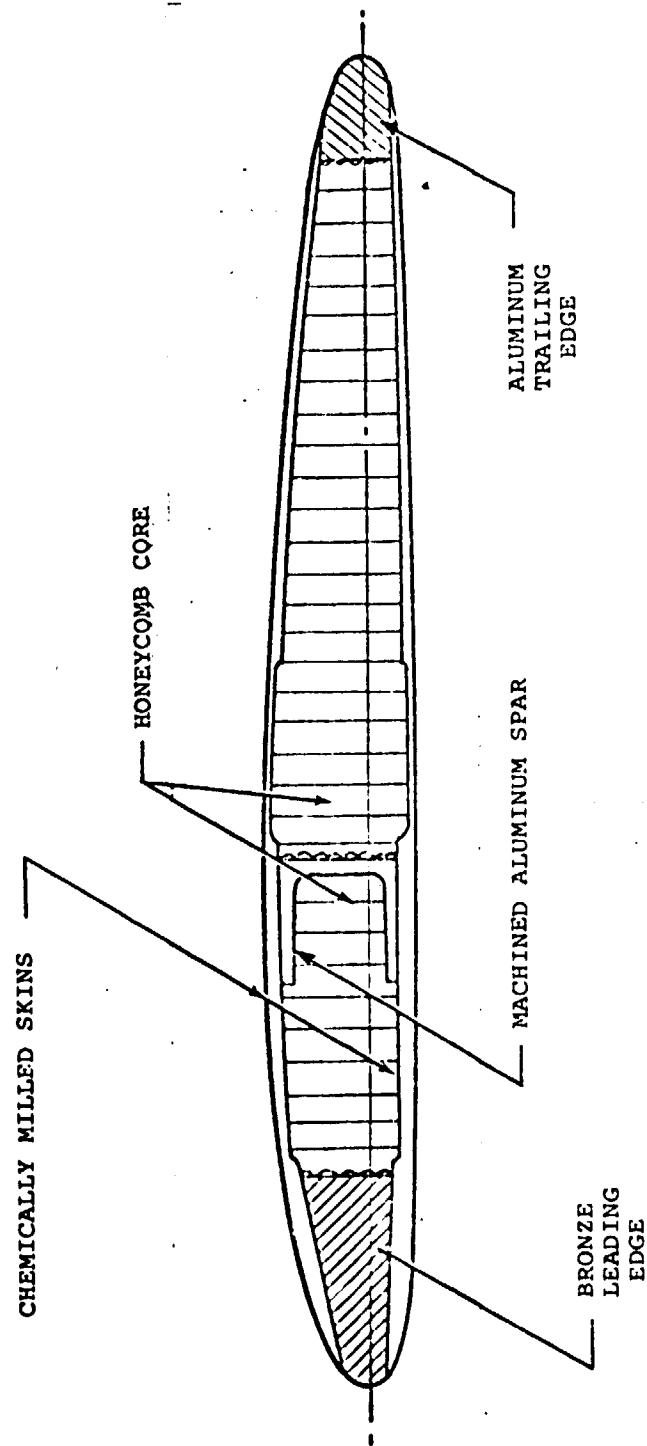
TYPICAL CROSS-SECTION OF MODEL ROTOR BLADE
